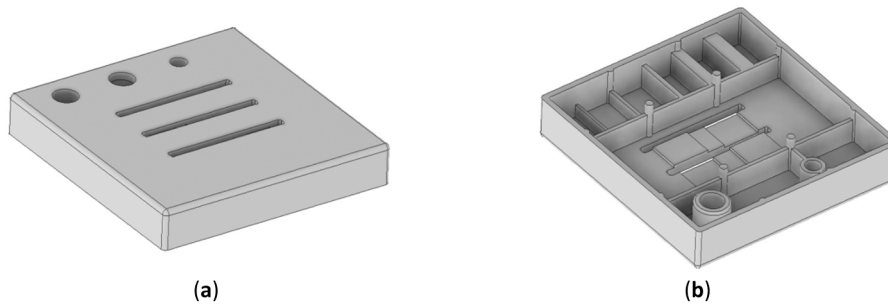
The CAD model of the product: (a) top view (b) bottom view.
